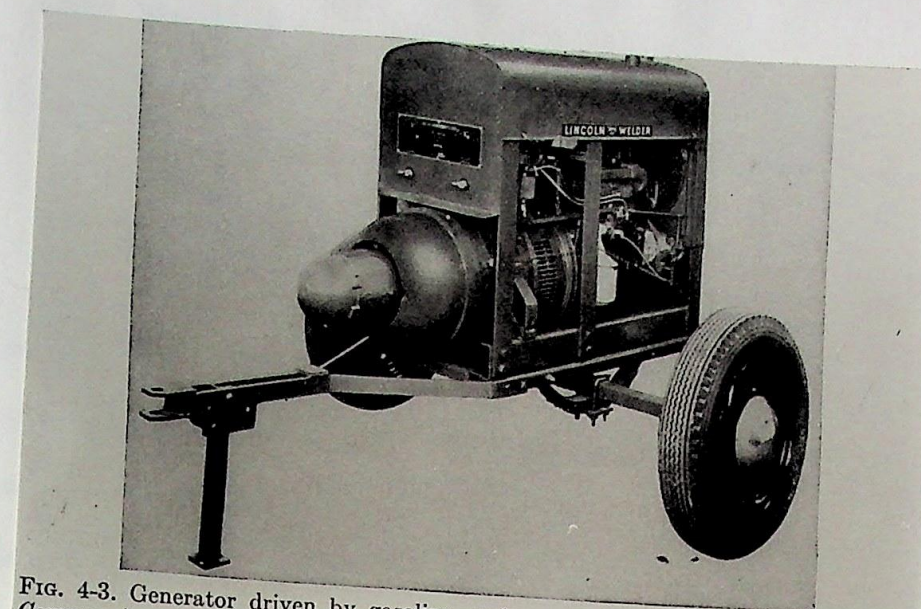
Generator driven by gasoline engine. (Courtesy of The Lincoln Electric Company.)
